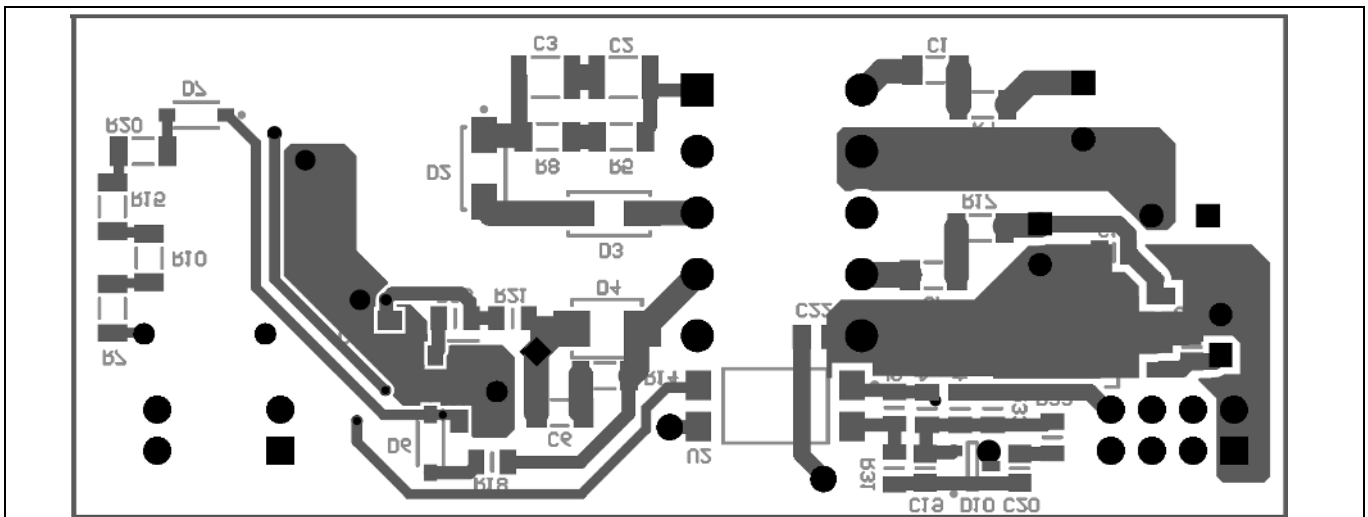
Auxiliary power supply circuitry layout of the EVAL-M1-IR2214 – bottom view
